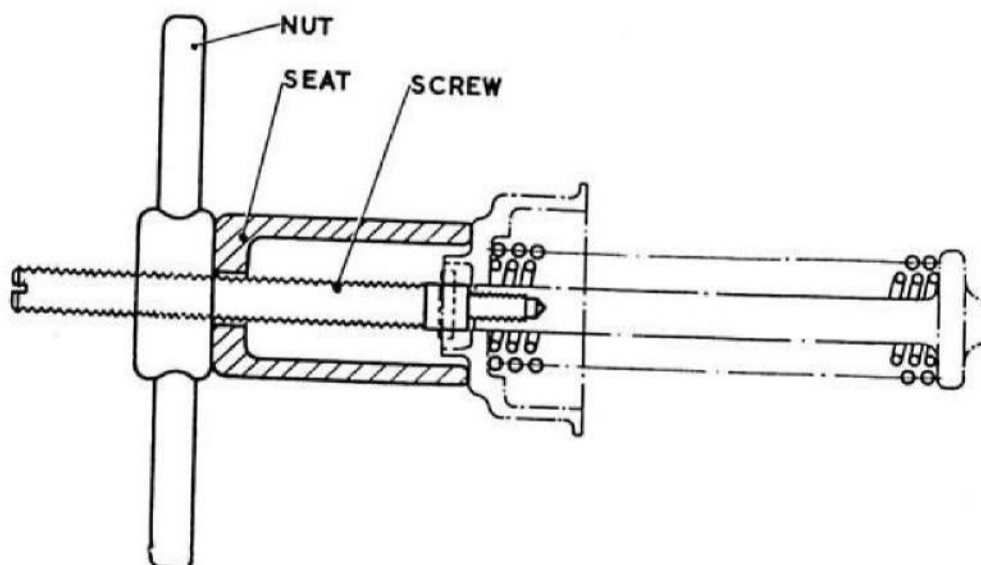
Cocking tool (Venom/Vampire aircraft)
